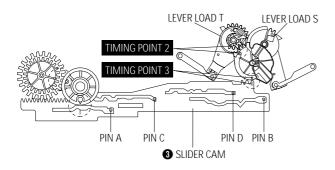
Gear Loading Drive, Slider Cam, Lever Load S, T Ass'y Assembly
